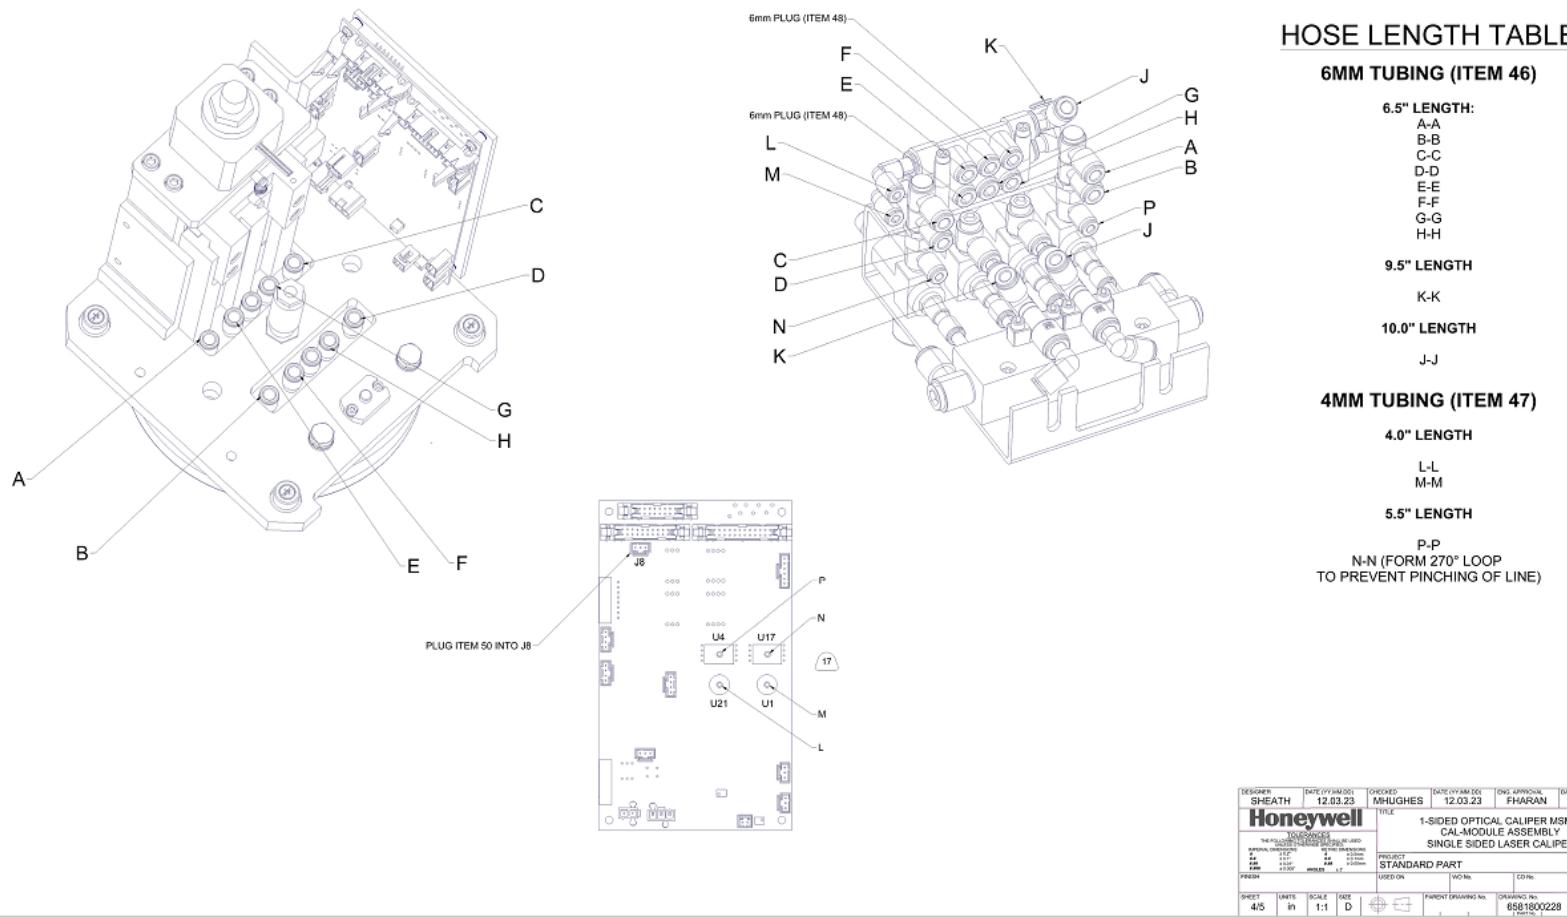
Laser Caliper Sensor CAL-module Assembly (2 of 5)
